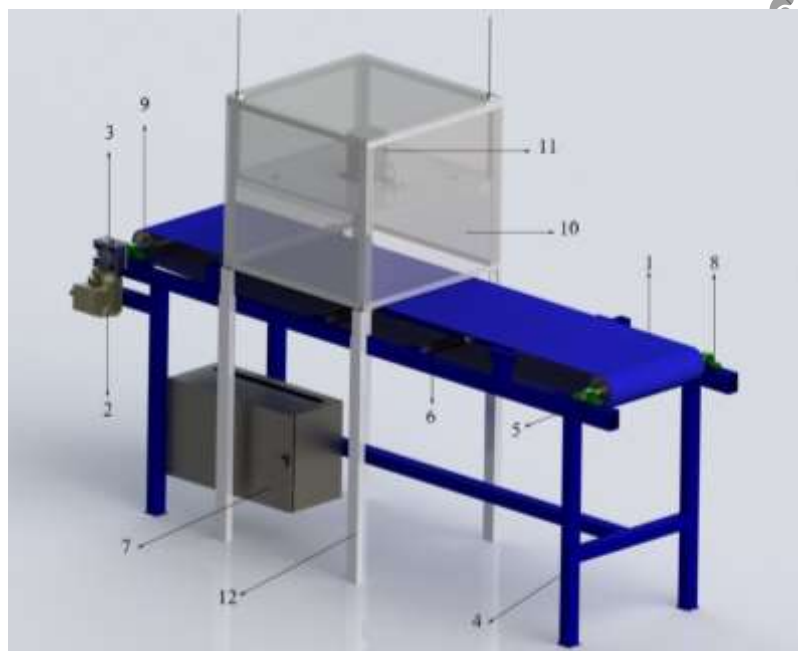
Designed chassis and conveyor belt: 1. Belt, 2. Electromotor, 3. Gearbox, 4. Chassis, 5. Driving roller, 6. Round roller, 7. Electronic and control chamber, 8. Bearing, 9. Drive roller, 10. Lighting and imaging box, 11. Camera, 12. Chassis of lighting and imaging chamber
